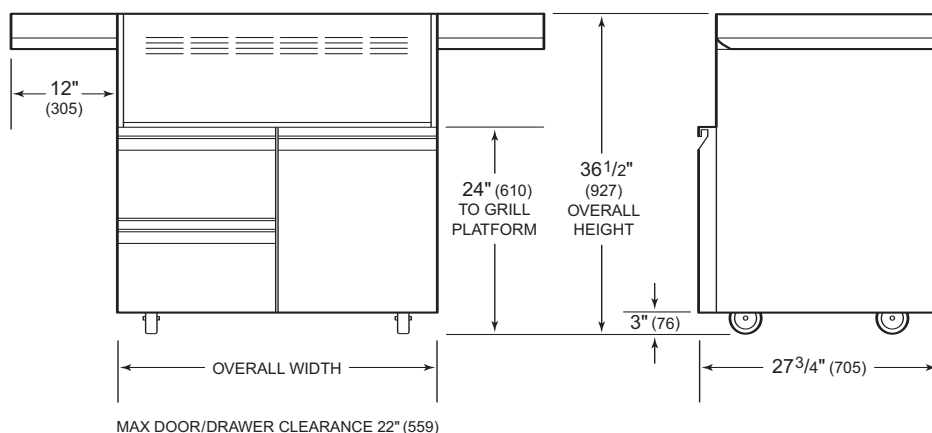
Grill & Cart Dimensions (See Tables Below for Width Dimensions)
